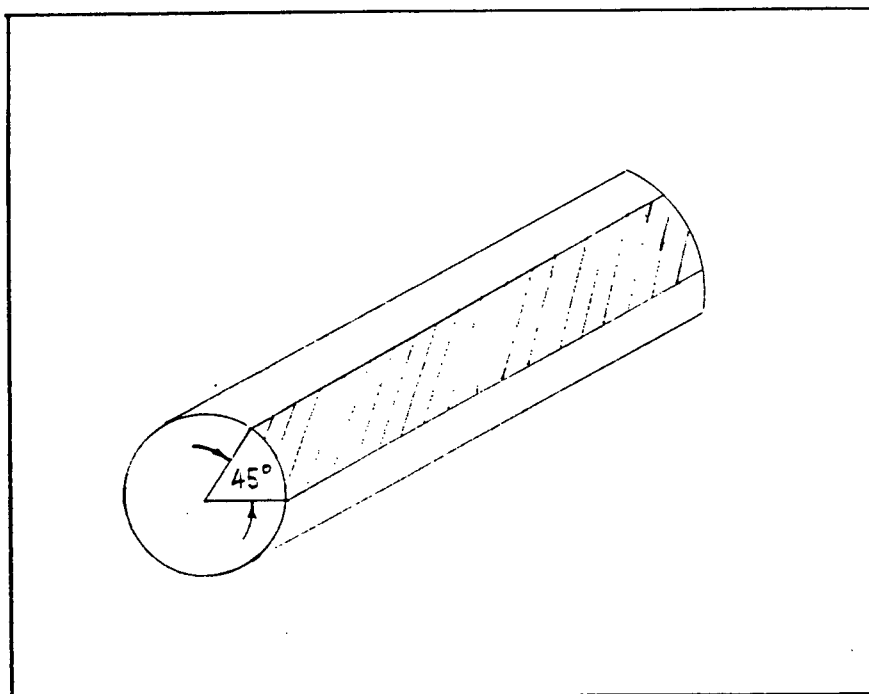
Continuously welded tube with spot angle of 45°
